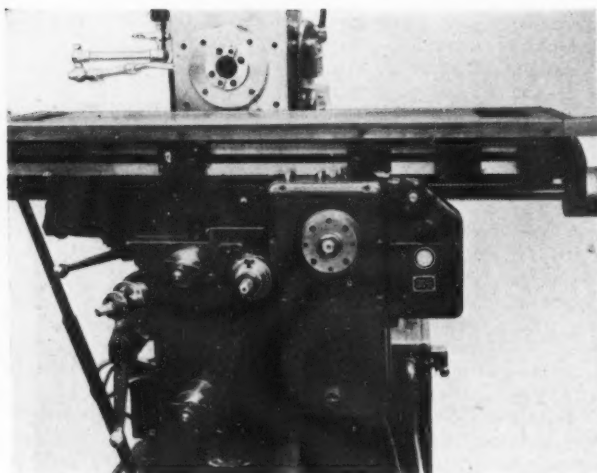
Close-up View of the Table Controls, with Covers Removed, on the Archdale 20-in. Milling Machine
